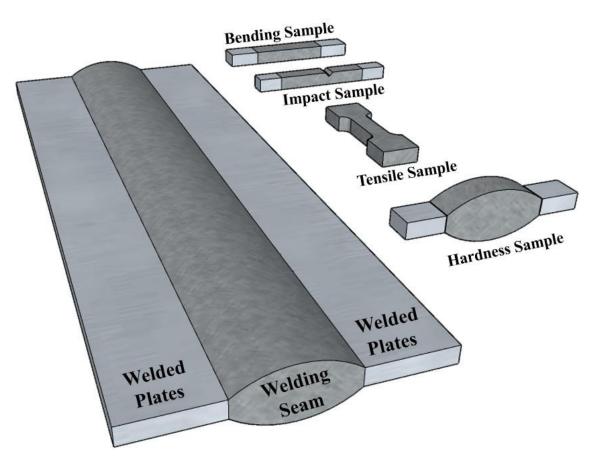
Schematic illustrations of test samples removed from welded plates.
